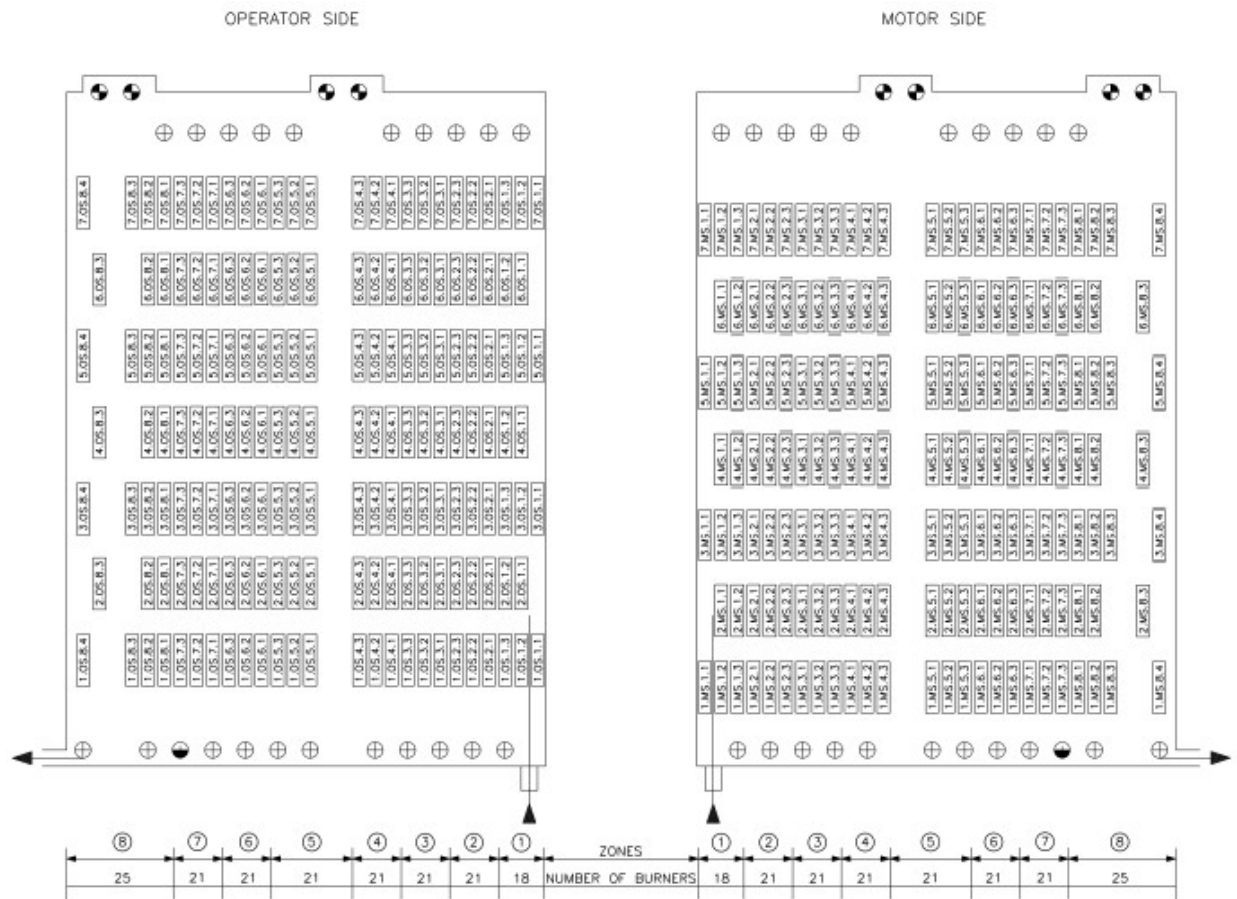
Drawing showing the radiant tube location within the furnace<sup>50</sup>
